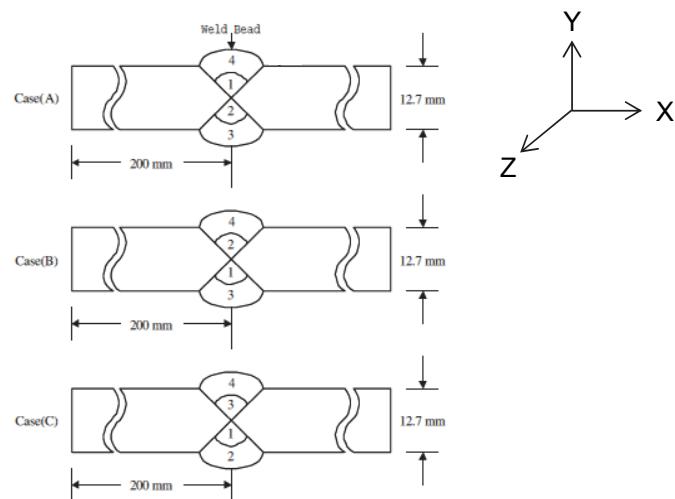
Different cases of multi-pass butt welding sequence [11].
